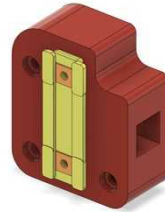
Motorized Side Conveyor Holder: IGUS rail link and hole for MAKERBEAM to connect to the Lift
